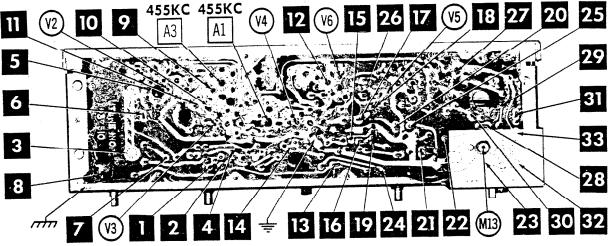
Bottom view of master chassis printed board with Circuitrace points as shown on schematic in Fig. 19.
